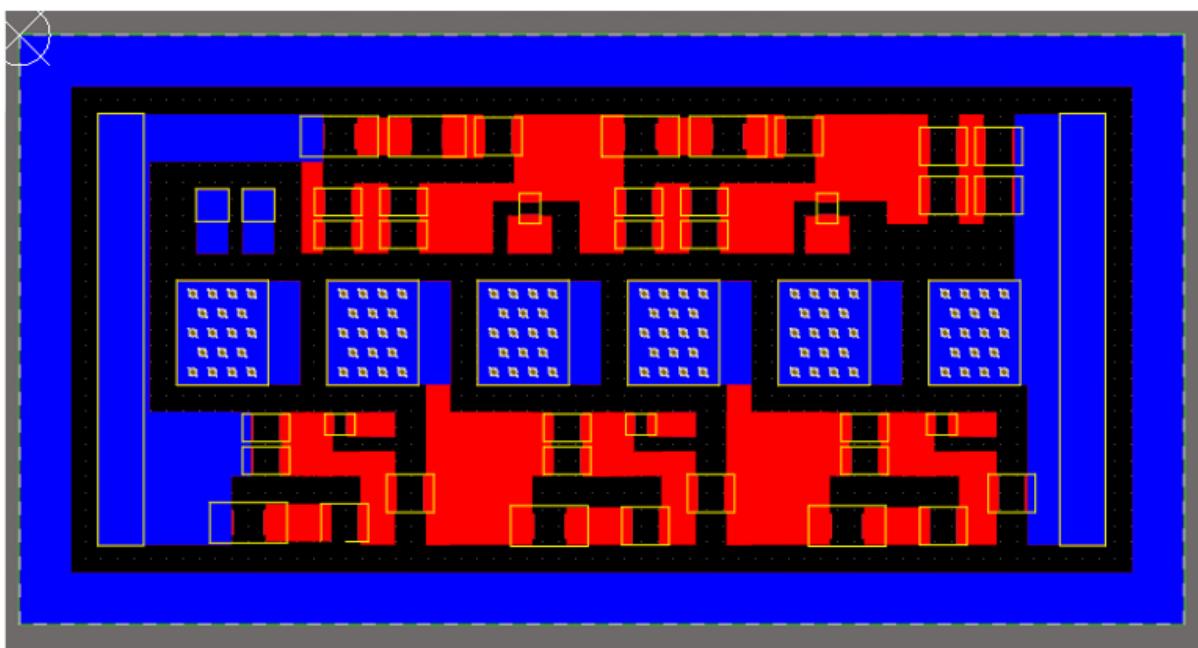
Bottom layer ERCD design (Blue: Copper masked, Purple: Exposed copper or Wirebondable area, Black: ERCD, Yellow : Solder Stops)
